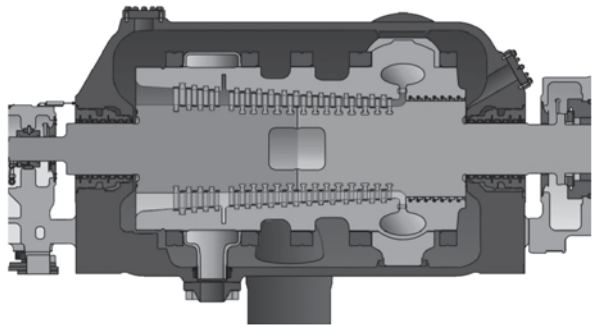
IP part of a large steam turbine. (Courtesy Alstom)
